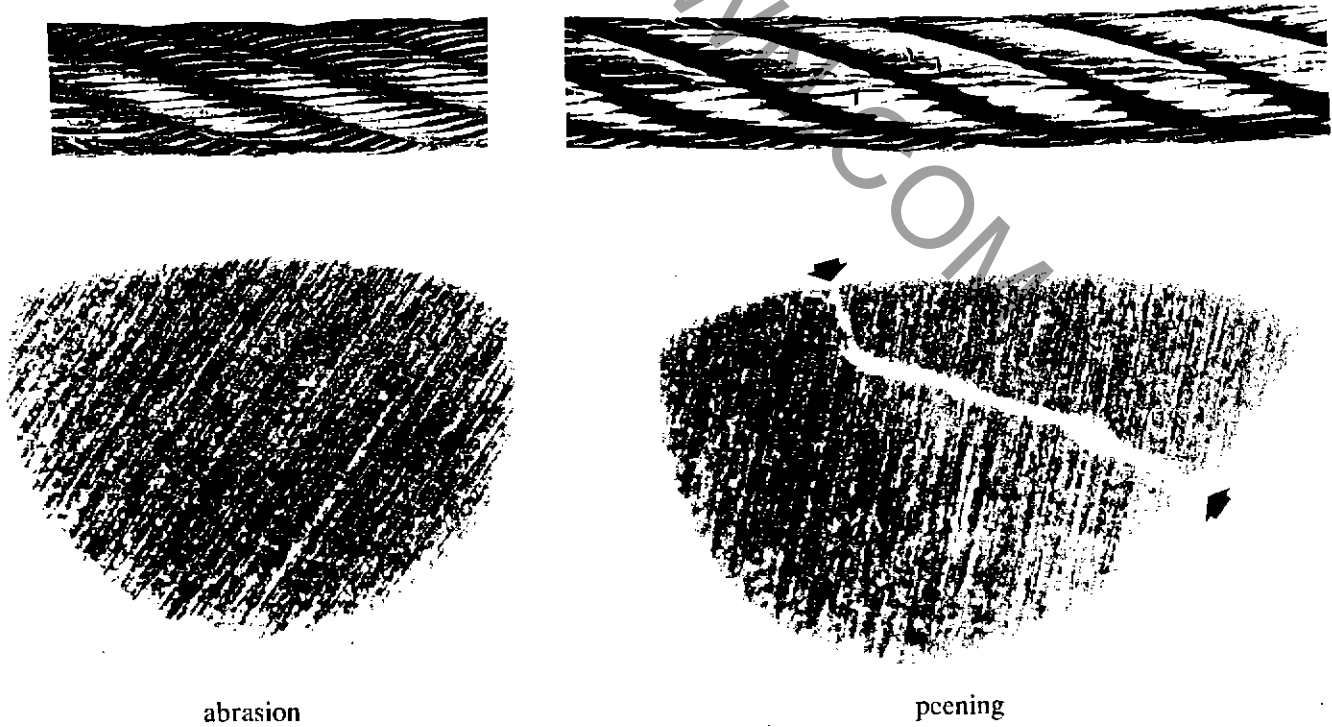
These plan views and cross sections show the effects of abrasion and peening on wire rope. Note that a crack has formed as a result of heavy peening.
